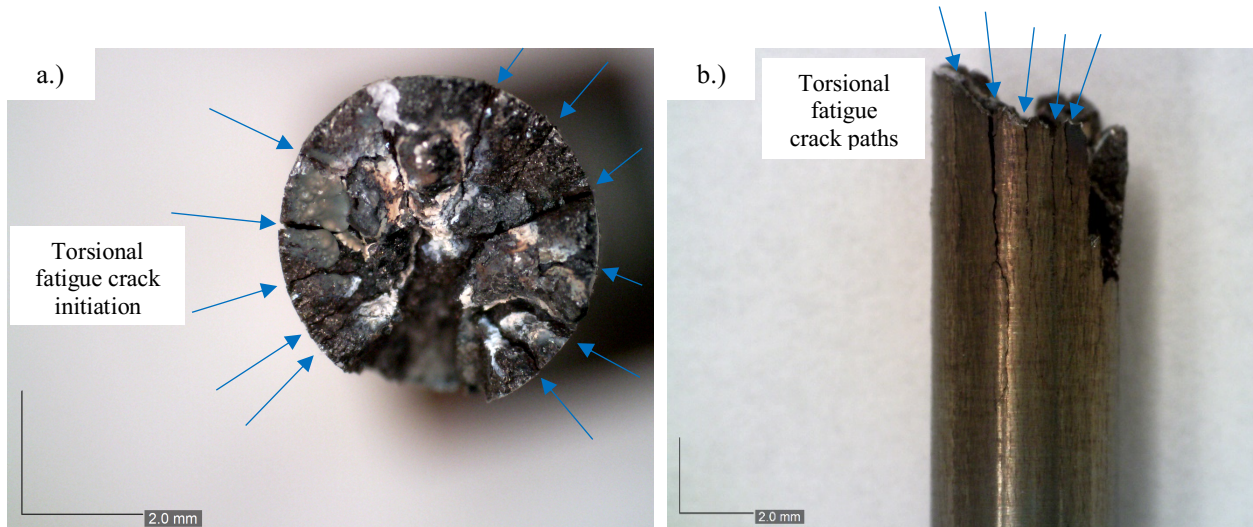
Microphotographic images of the machined and heat-treated DMLS IN718: a.) torsional fatigue fracture face and b.) side of fractured samples
